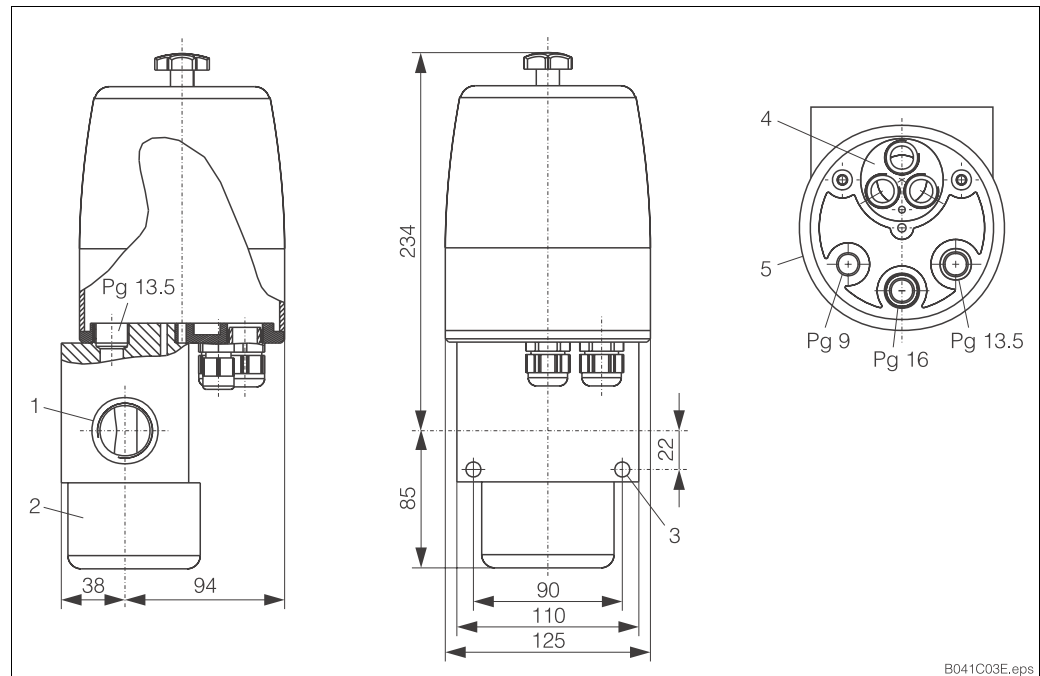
CPA 250-A00/01 with three electrode mounting places, material PP, with connection thread G 1
